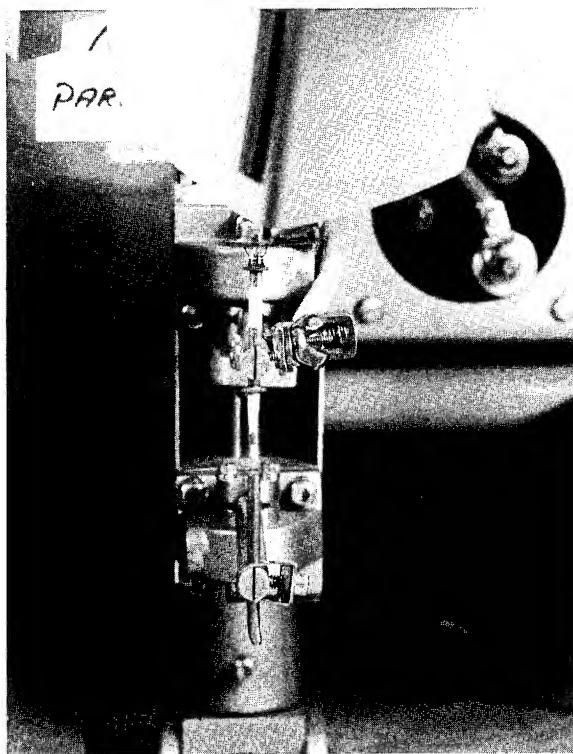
Conventional welding equipment modified for parallel-gap welding.
